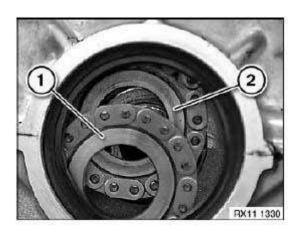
Timing Chain Sprocket Wheel And Oil Pump Sprocket Wheel Courtesy of BMW OF NORTH AMERICA, INC.
